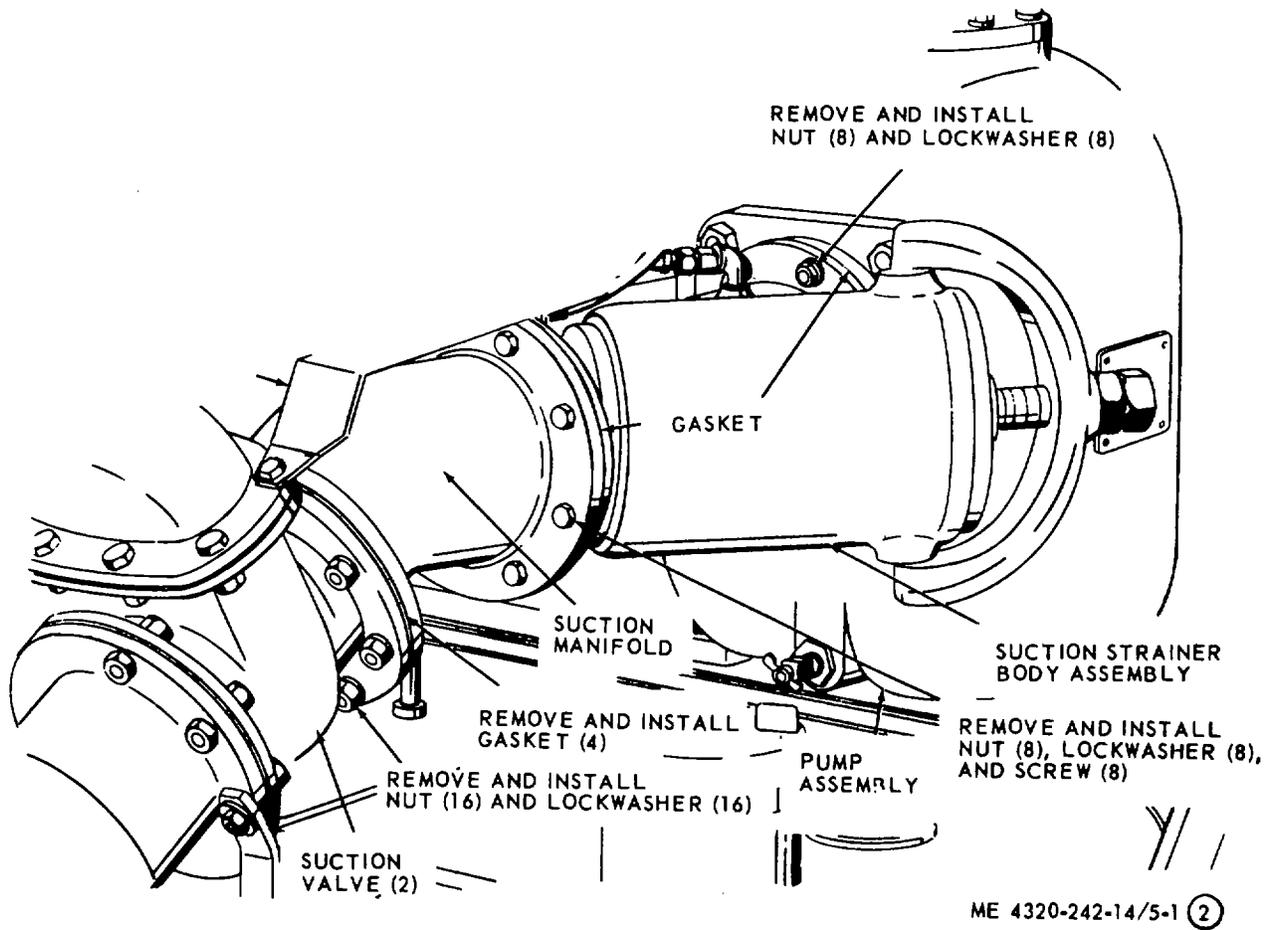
Suction manifold and strainer body assembly, removal and installation. Model 84C15-4A084, serial numbers 419501 through 419959. (Sheet 2 of 2)
